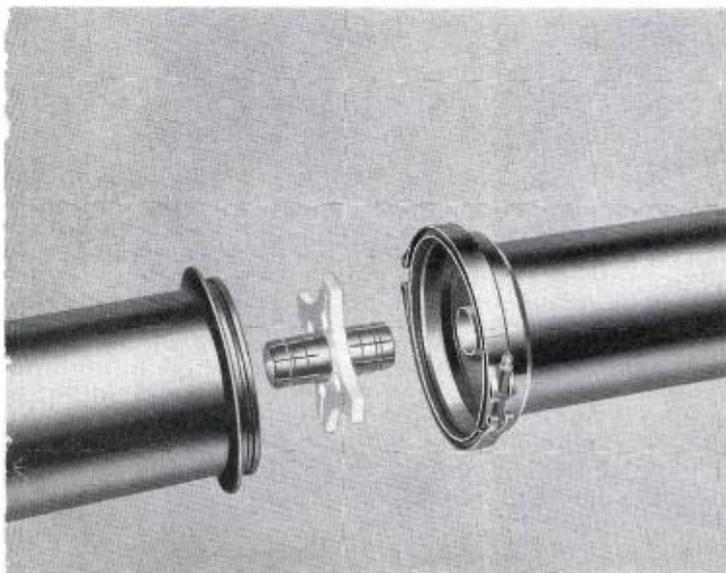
An exploded view of the flange connector on a section of 9/16-inch Universal Transmission Line.
